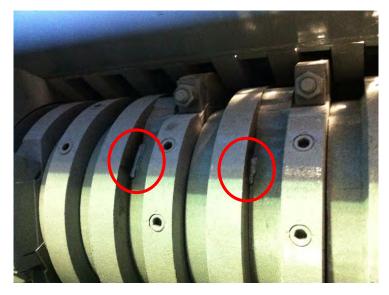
Rings Stitch-Welded in Pairs
